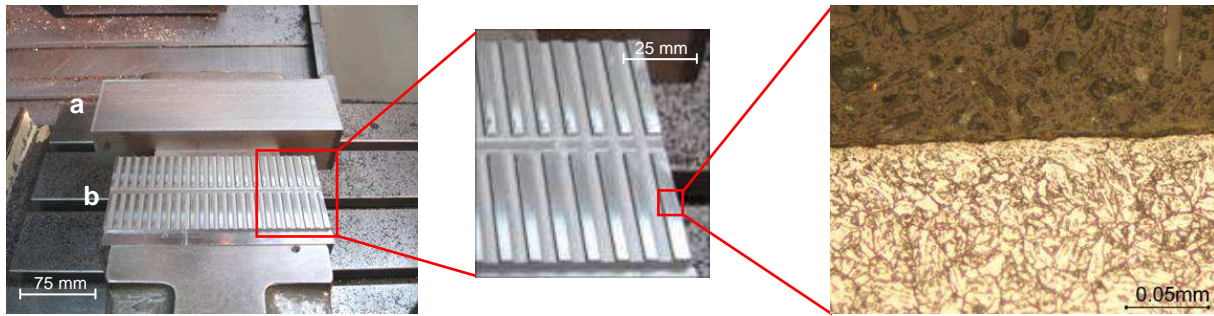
Workpieces used in the tests – (a) cutting, (b) – integrity evaluation for beginning and end of tool life.
